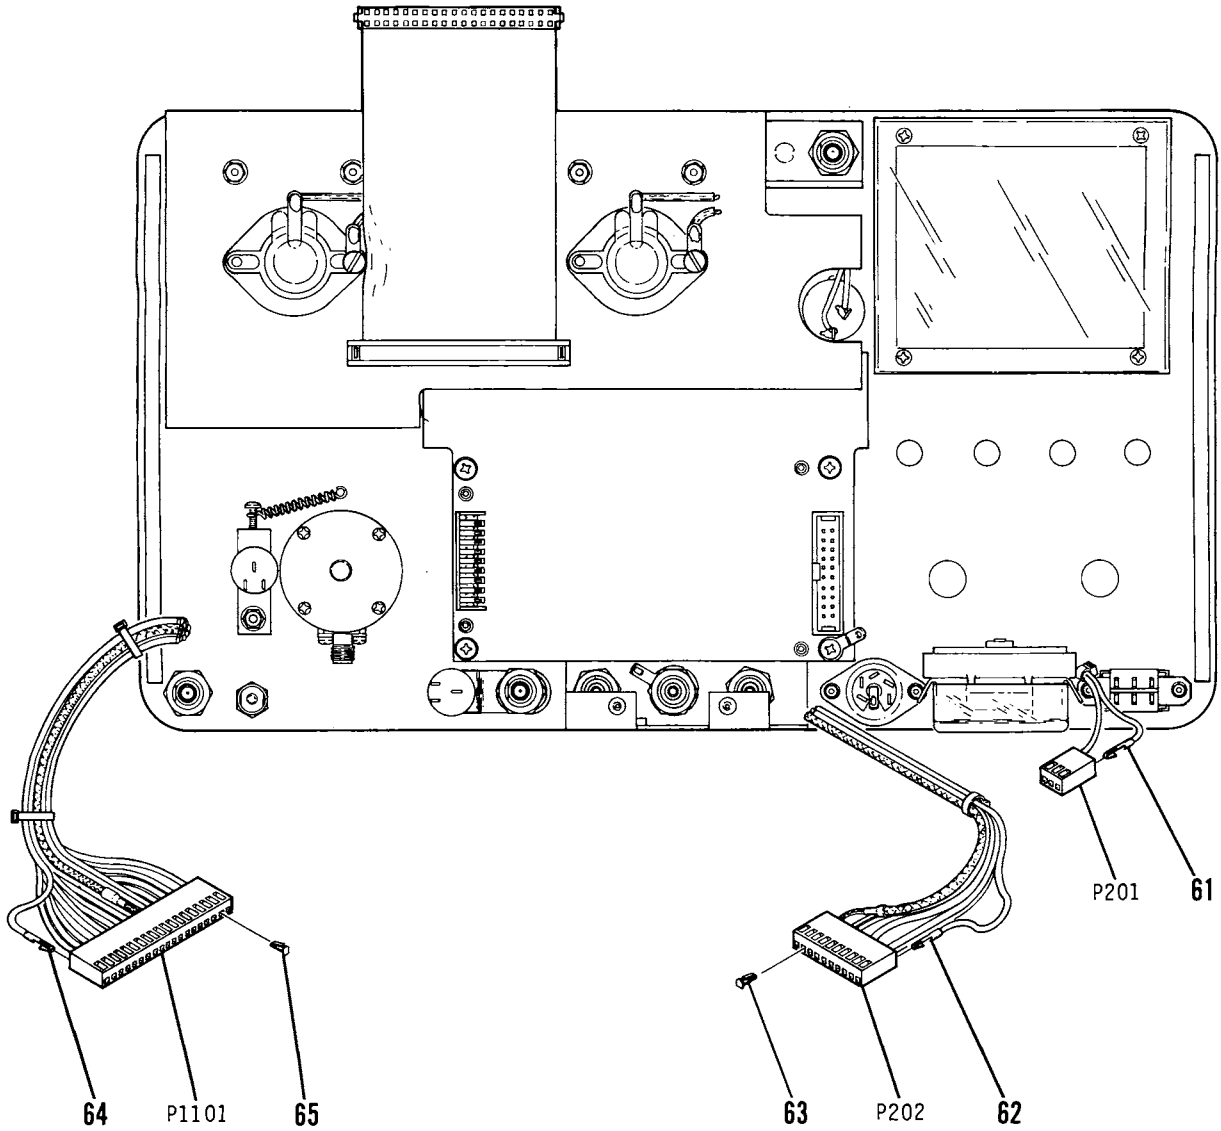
FRONT PANEL ASSEMBLY (SHEET 1 OF 2)
